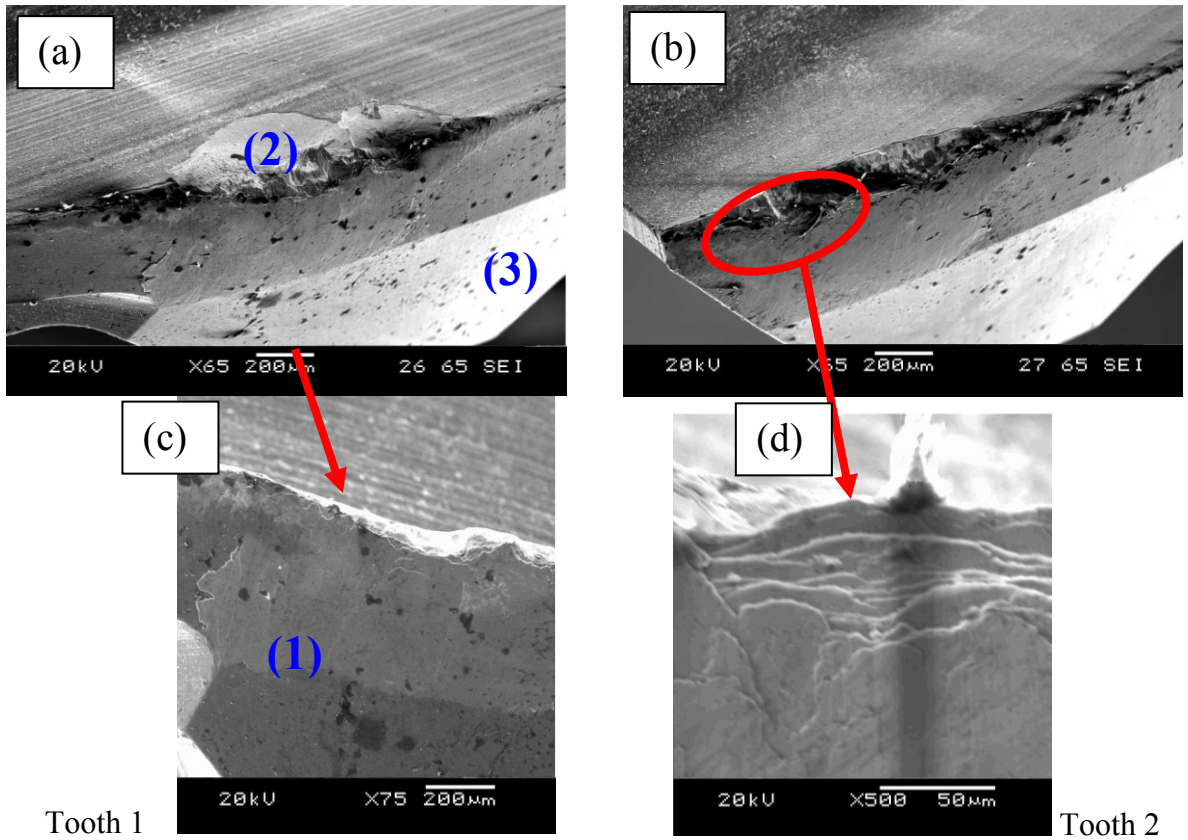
Side view of the cutting tool (Tooth 2 and 4 (even))
